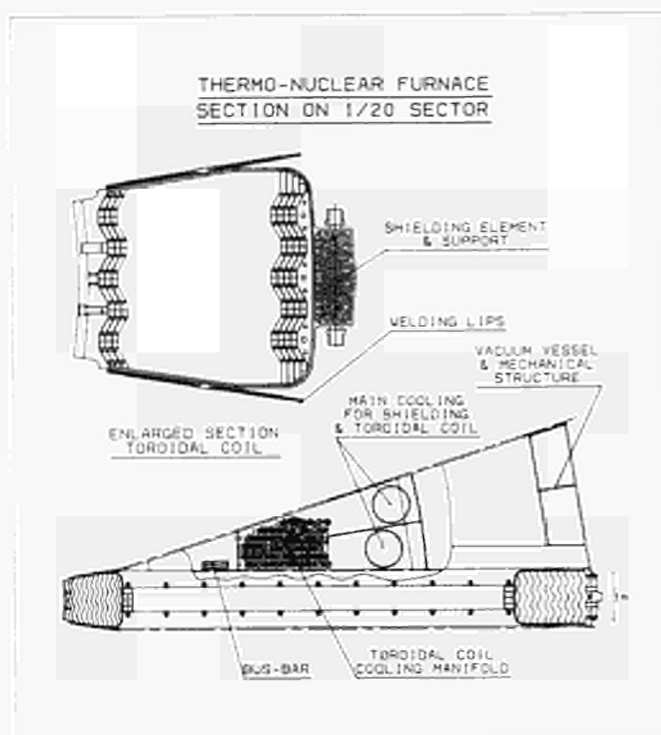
Section of a sector of JTF conceived as an integrated element including the toroidal coil, the vacuum vessel, and the mechanical structure. Toroidal field coils are shown.
